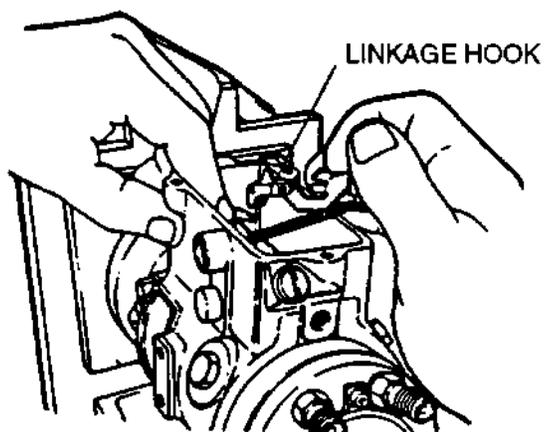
Disengaging Governor Linkage (Typical)
